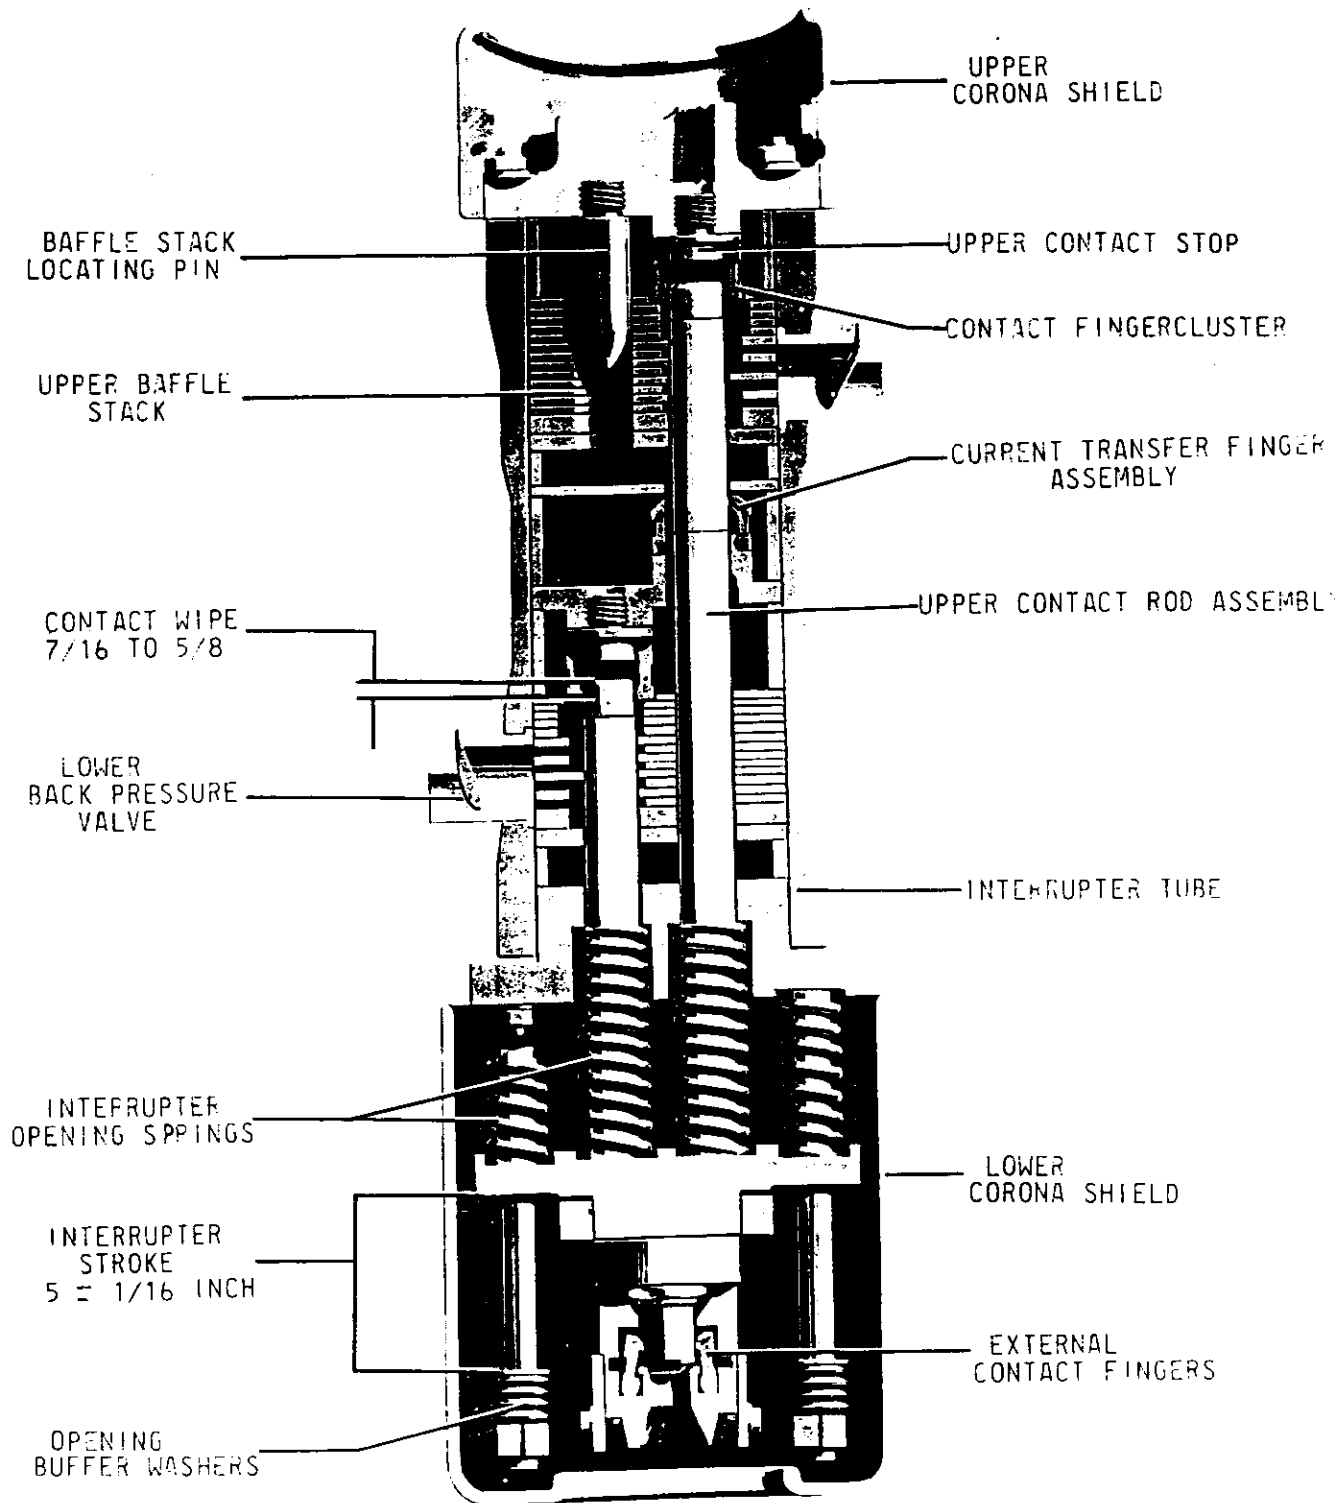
Cutaway Side View of the Interrupter of a Nominal 10,000 mva Breaker
